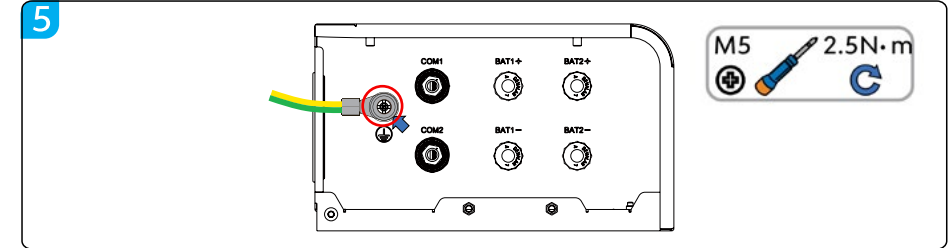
Expansion battery BDU grounding cable connecting procedures
